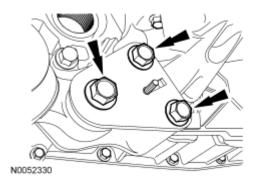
Locating Rear Subframe Nuts Courtesy of FORD MOTOR CO.
